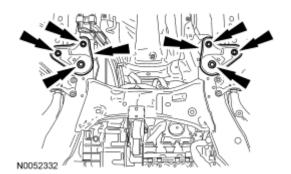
Locating Subframe Support Brackets, Nuts & Bolts Courtesy of FORD MOTOR CO.
